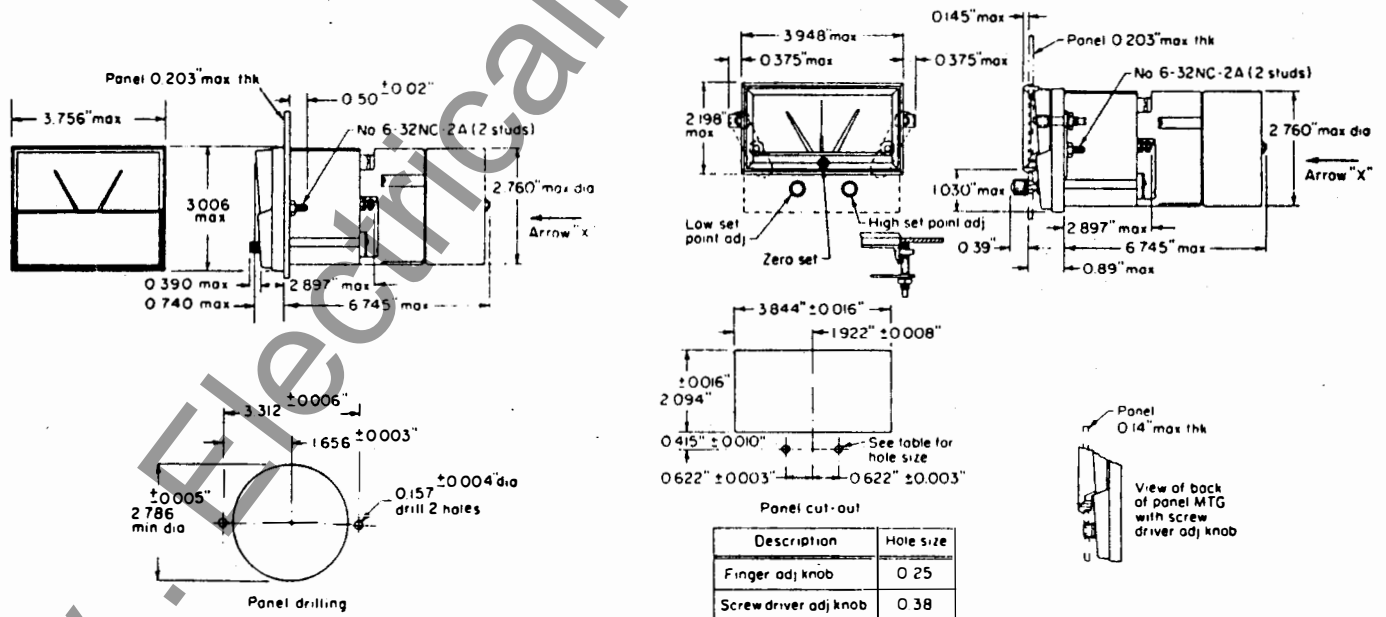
Outline and panel cutout dimensions for Type 196 meter relay, 3 1/2-inch size, front mounted.
